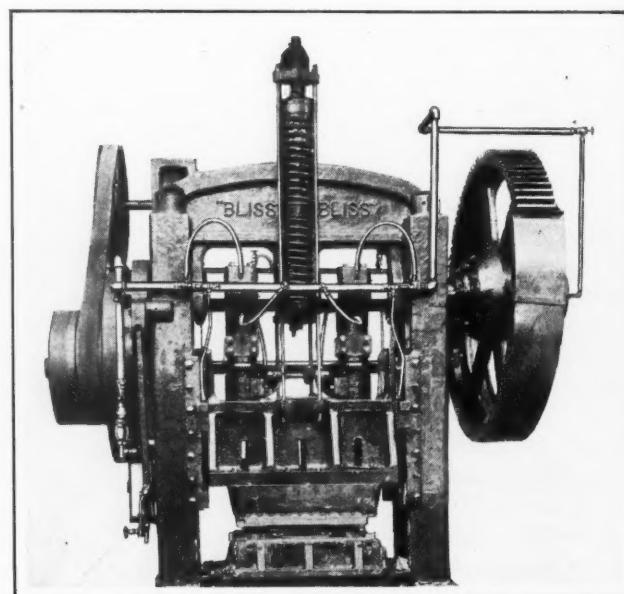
Power Press Equipped with the "Ideal" Lubricating System
